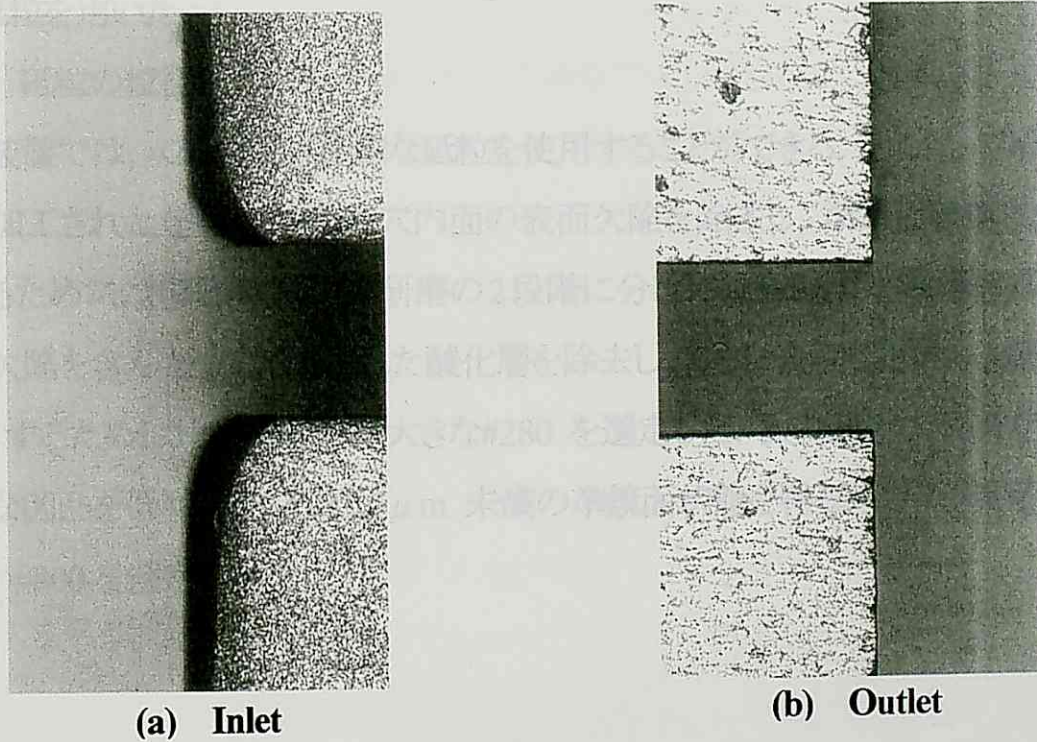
Enlarged view of workpiece after combined polishing by new polishing equipment
